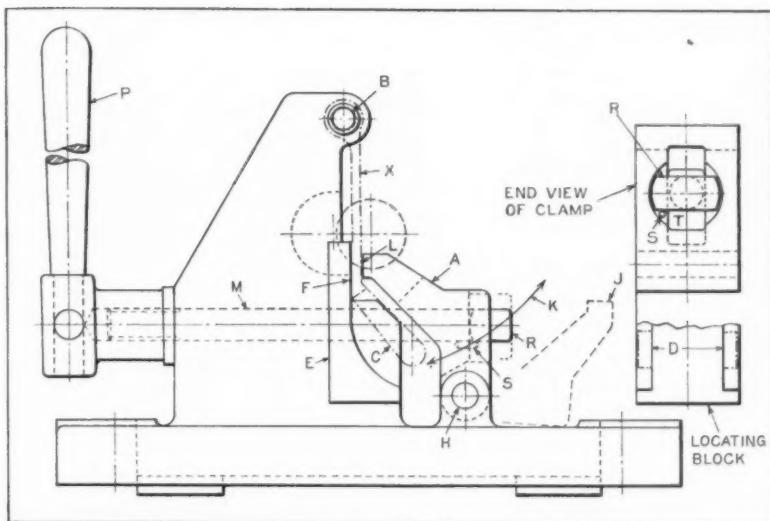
Fixture with Swinging Clamp Slotted for T-head of Bolt
